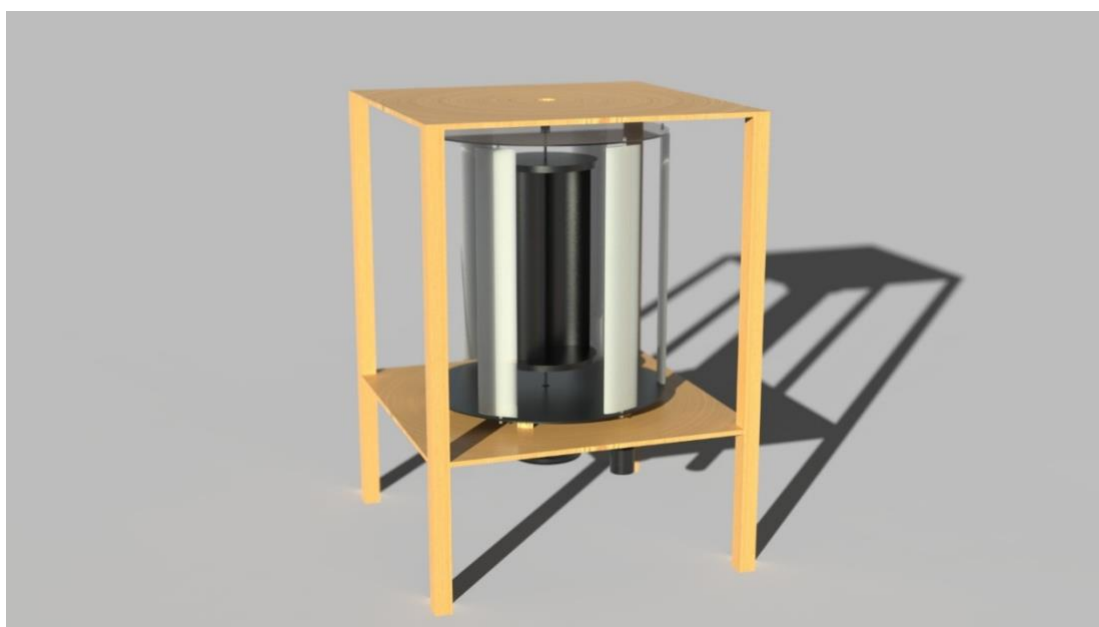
Complete Concentric Counter-Rotating VAWT Assembly.
